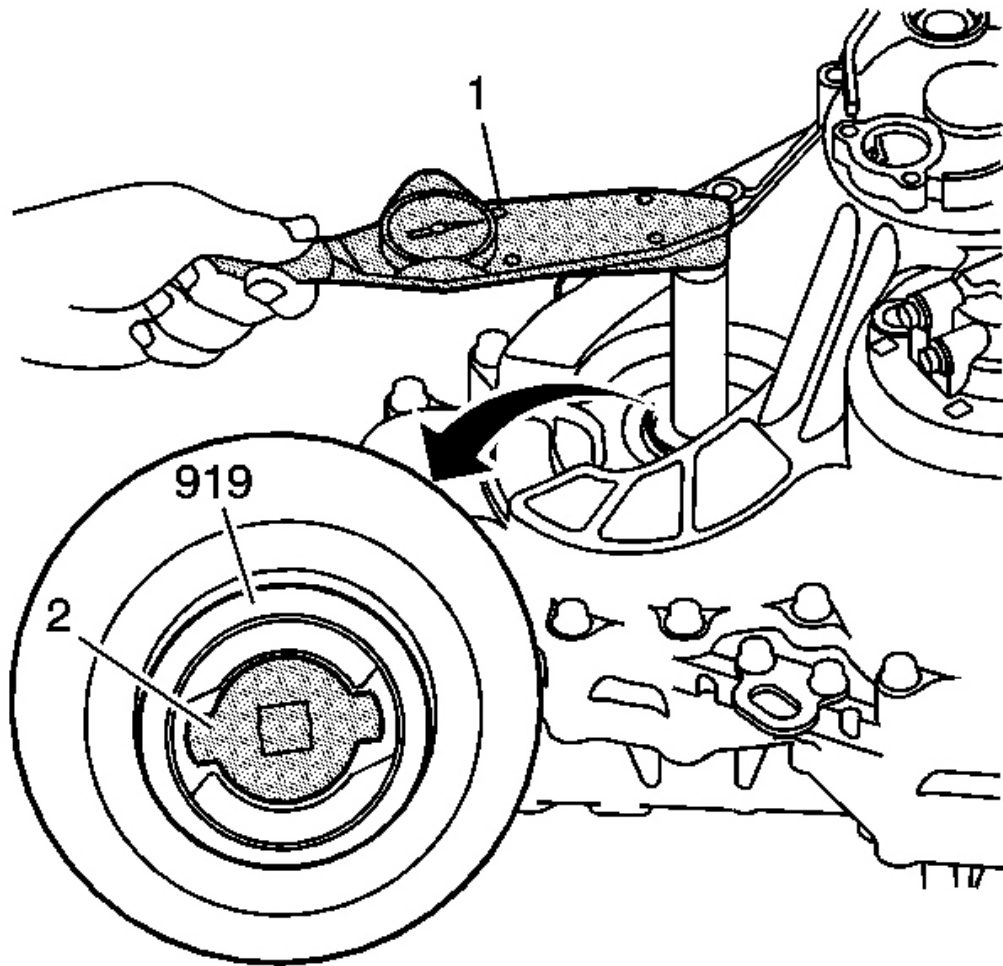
Rotating The Differential Assembly In Both Directions In Order To Seat The Bearings Using DT 46410
